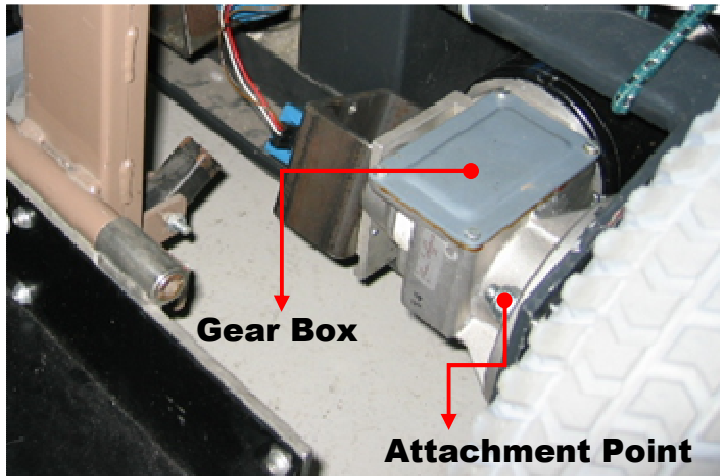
GEAR BOX AND PM DC DRIVE MOTOR SHOWING A SINGLE ATTACHMENT POINT TO THE CHASSIS
